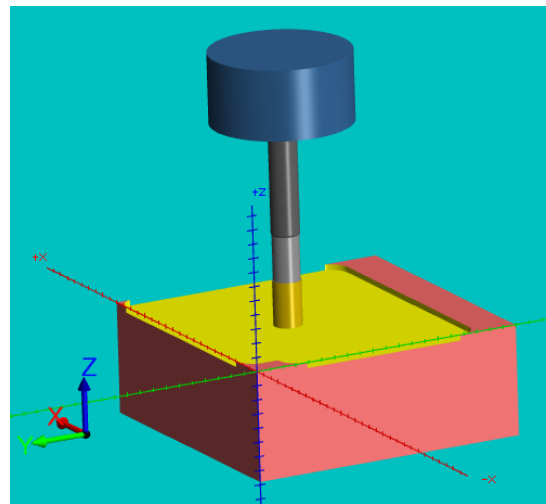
Snipping Tool Image of Step 1 Mastercam Tool Path
